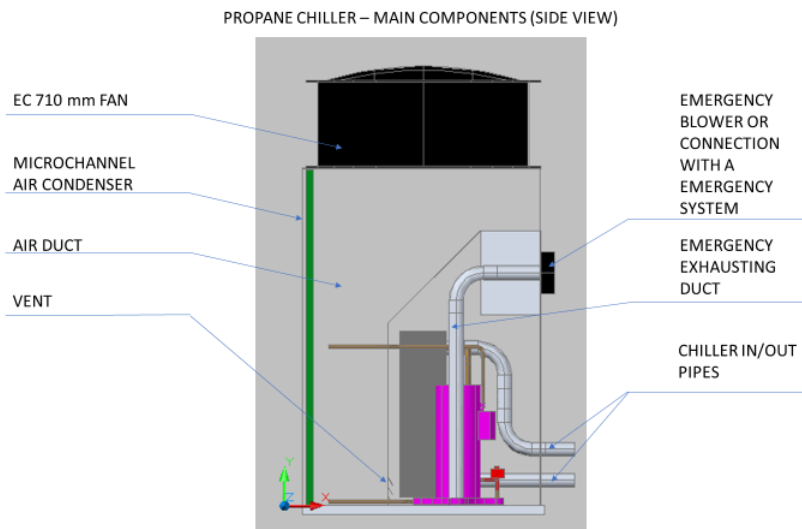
Side view of the R-290 chiller showing main vapor compression system components.
